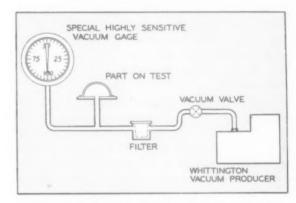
Schematic diagram of a vacuum testing machine shows the essential parts of the system.
